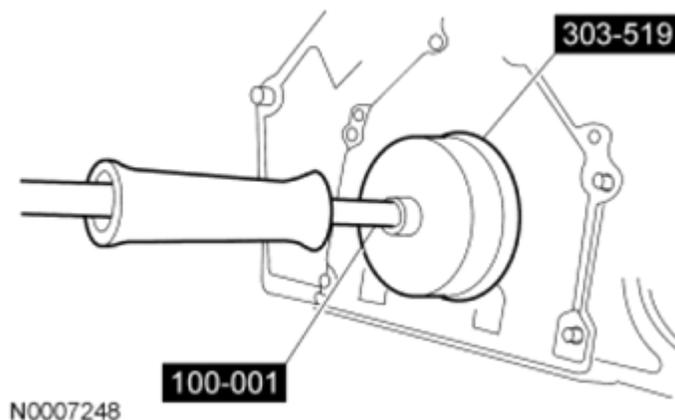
Removing Crankshaft Rear Seal Using Special Tools
